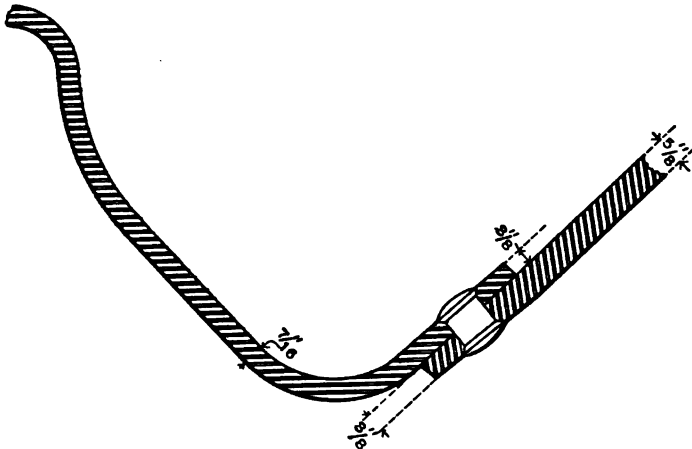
Joint between Tube Sheet and Furnace Flue, showing countersunk rivet where exposed to the fire.
